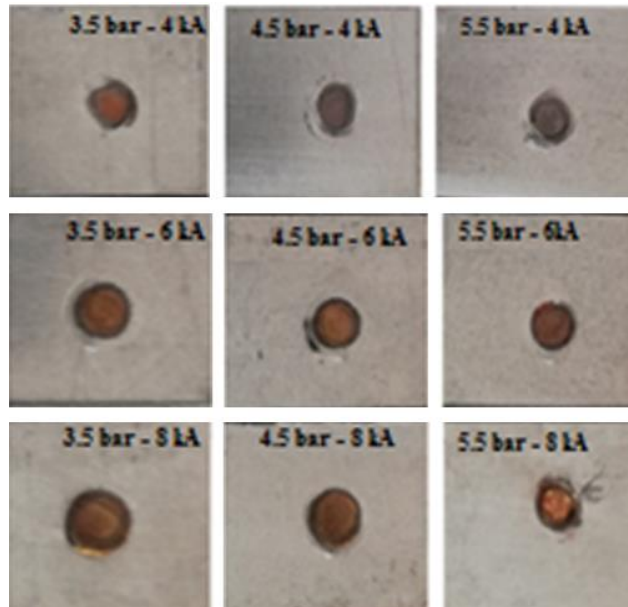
Macro photography of weld nuggets of RSW samples.
